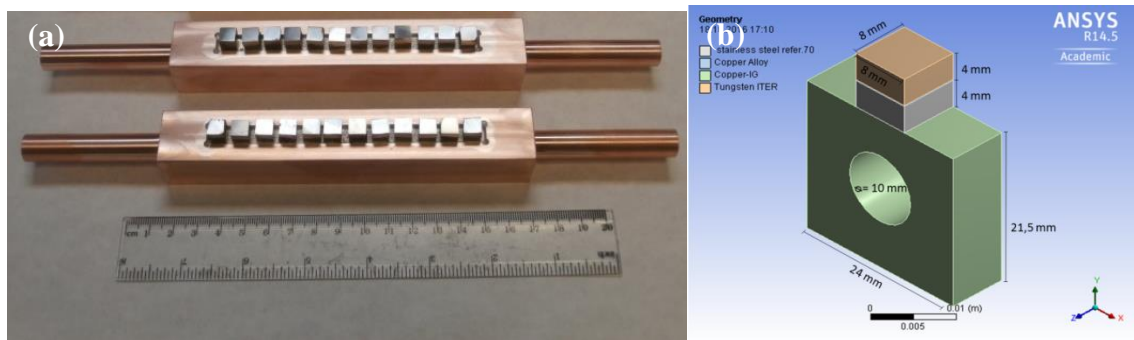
(a) General view of cooling structures with the brazed samples used for HHF tests. (b) Schematic representation and dimensions of the sample and cooling component.
